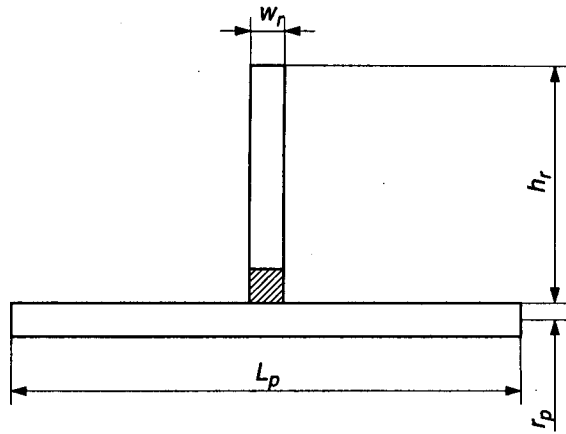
Example 1: welding of ring stiffener to short pipe. One weld pass is used to simulate welding operation.
